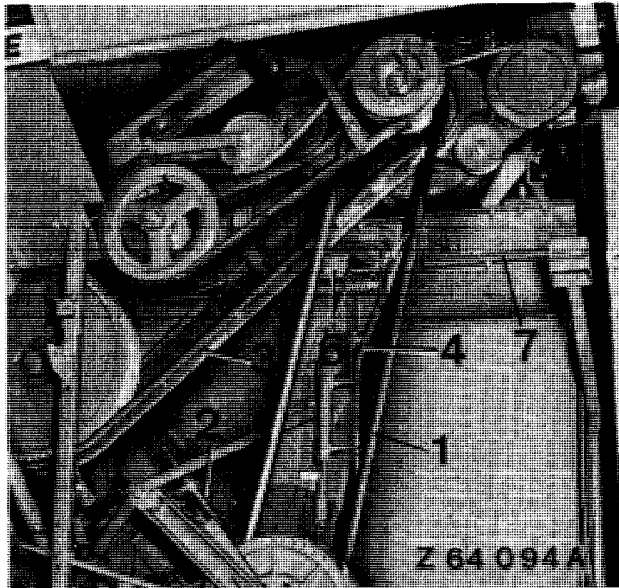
Preparing to Remove Engine (Combines with Variable Ground Speed Drive)
